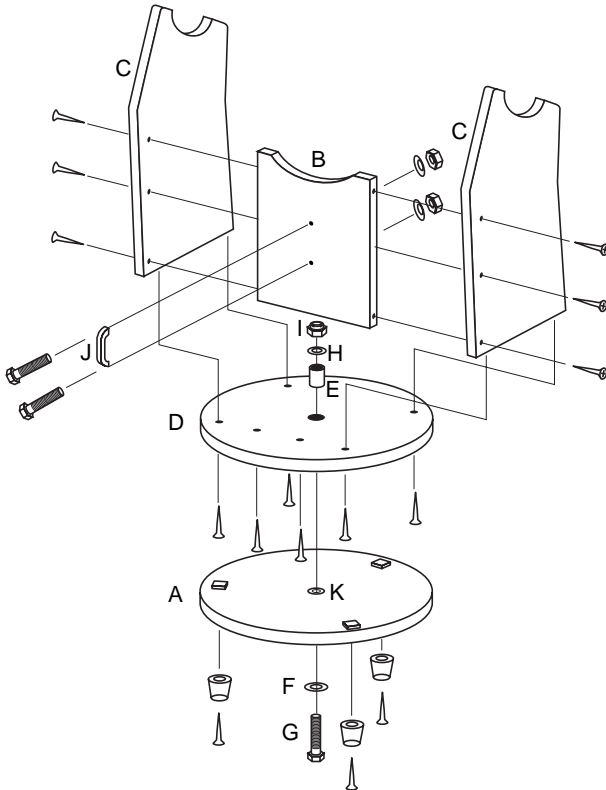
Exploded view of the SkyQuest XT Dobsonian base.
